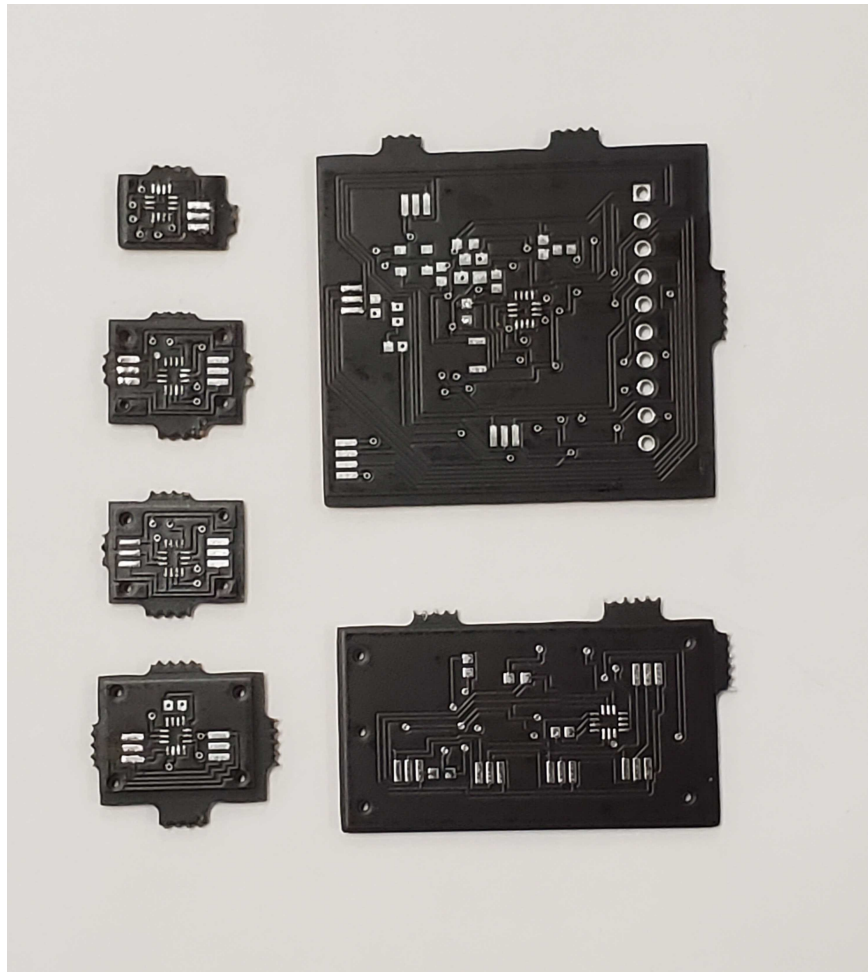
The custom-designed PCBs ordered from JLCPCB that IMUs were soldered onto for the device.
